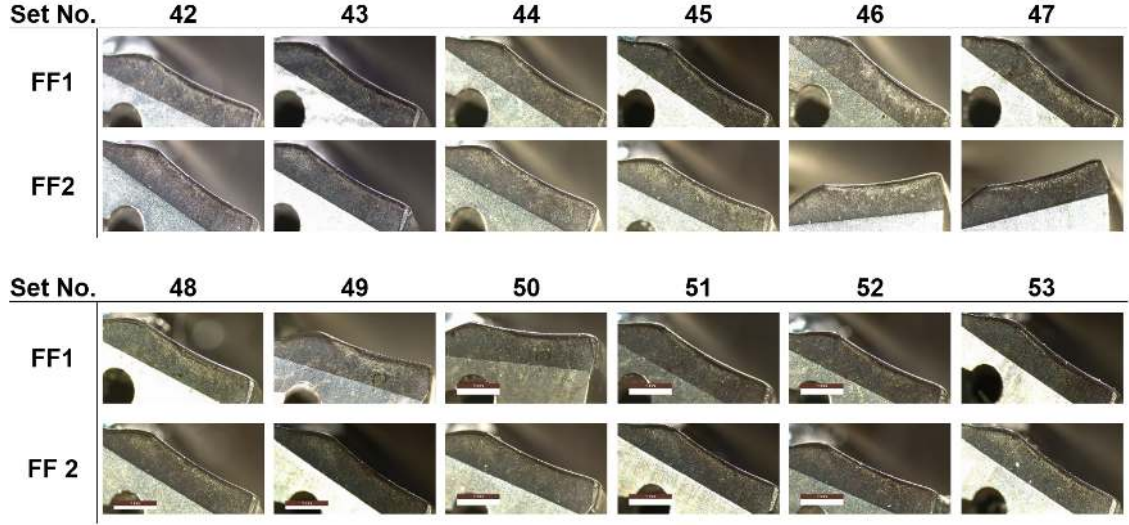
Tool flank wear for selected measurement sets, where FF1 and FF2 denote Flank Face 1 and Flank Face 2, respectively.
